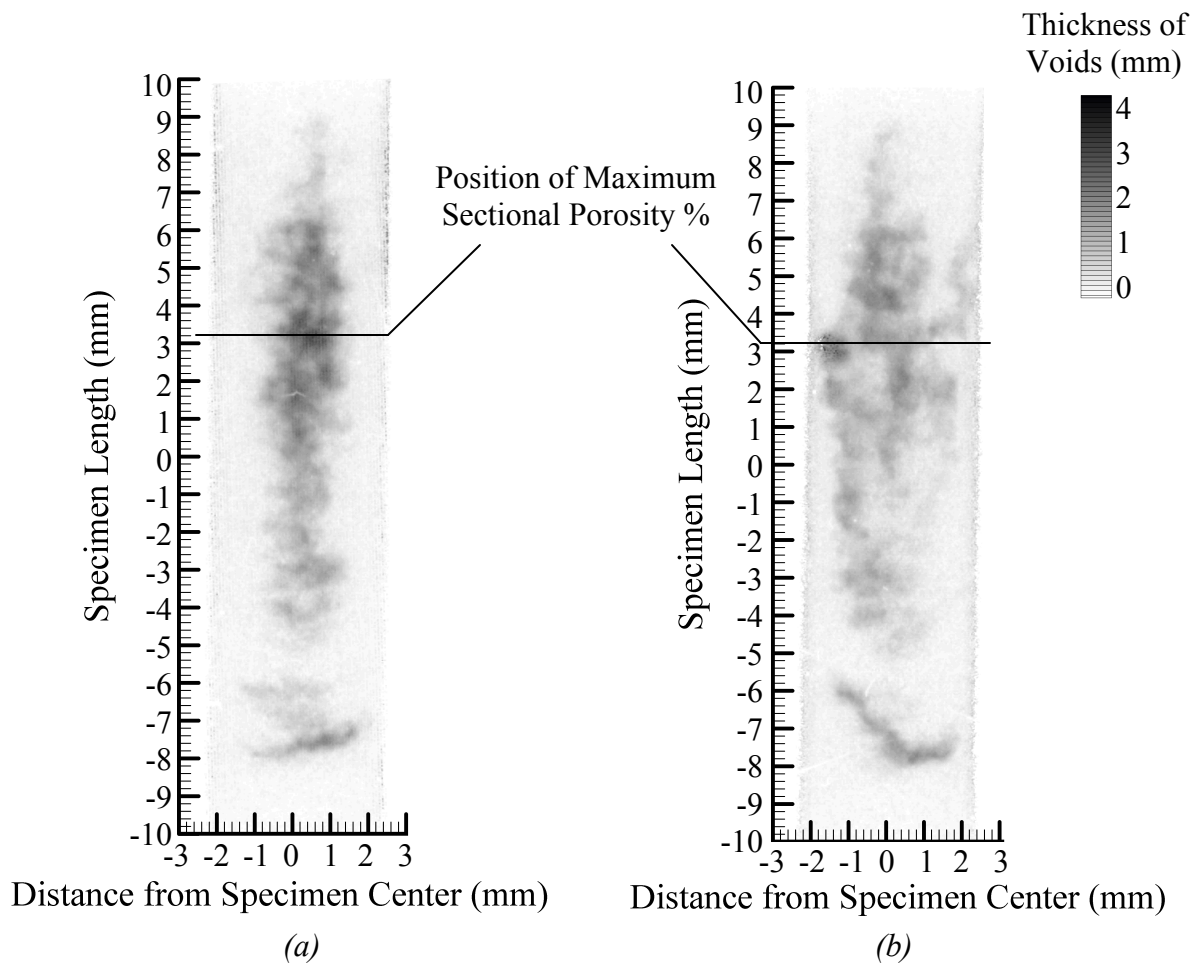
(a) Digitized radiograph of Specimen 3, View 1; (b) Second radiographic view of same specimen taken after rotating 90 degrees about lengthwise axis, View 2.
